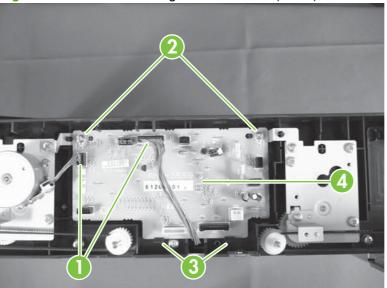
Remove the right belt-drive unit (3 of 6)
